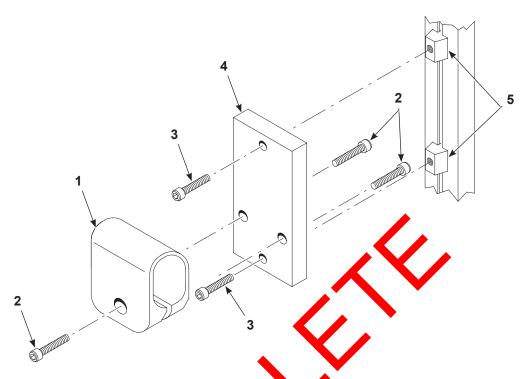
Extrusion Gun Mount Assembly for Tube-Mount Assembly for Tube-Mount
